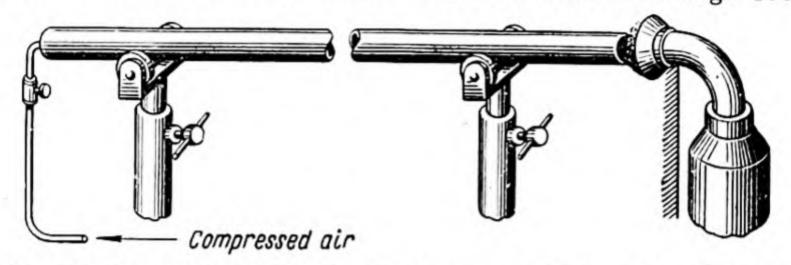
Arrangement used for blowing out steel pipes after cleaning.
